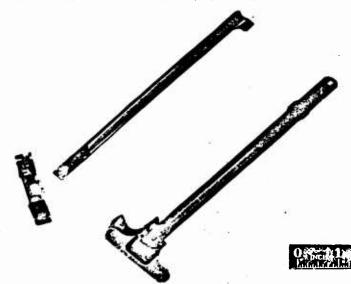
Broken Charging Handles Showing Separation of Tang from Handle at Weld.
